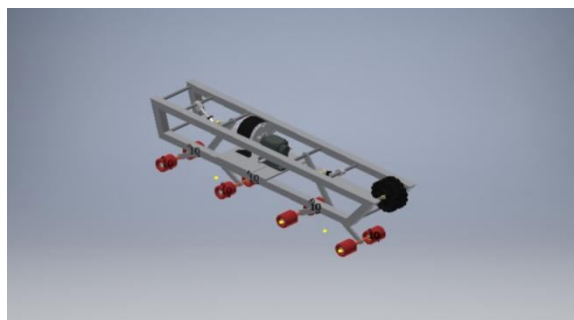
CATERPILLAR CHASSIS ISO VIEW
